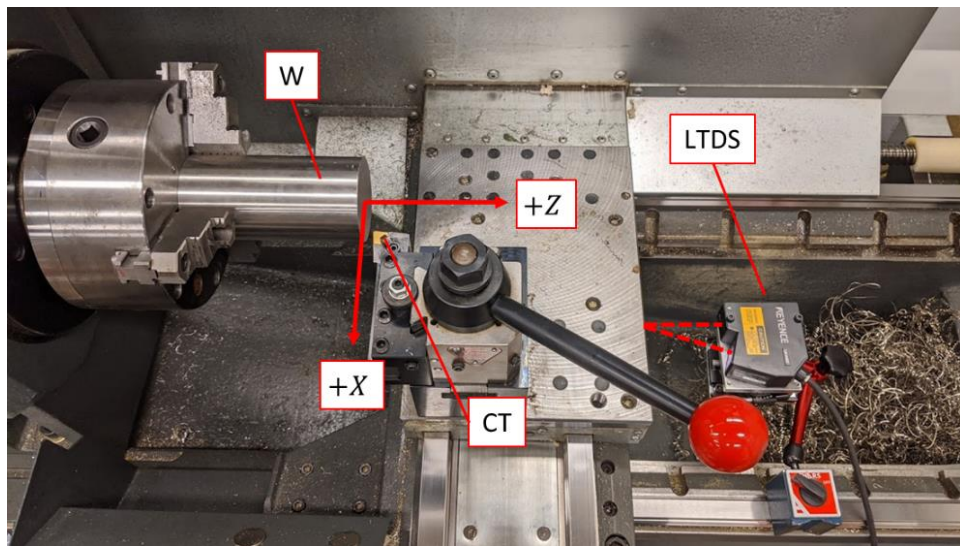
Photograph of outer diameter turning setup including workpiece (W), cutting tool (CT), and laser triangulation displacement sensor (LTDS).
